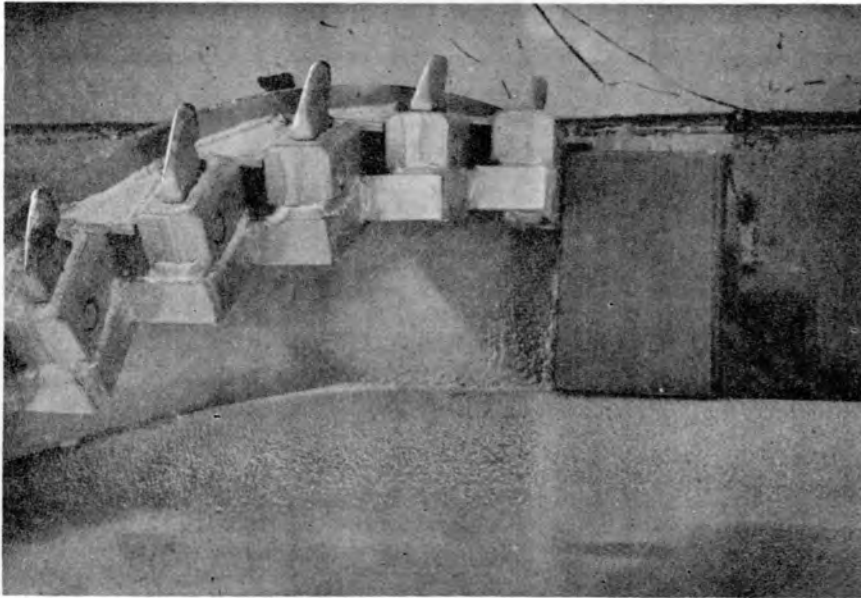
Closeup of teeth and their mounts. The bit holders are welded to stripping which in turn is welded to the auger flighting.
